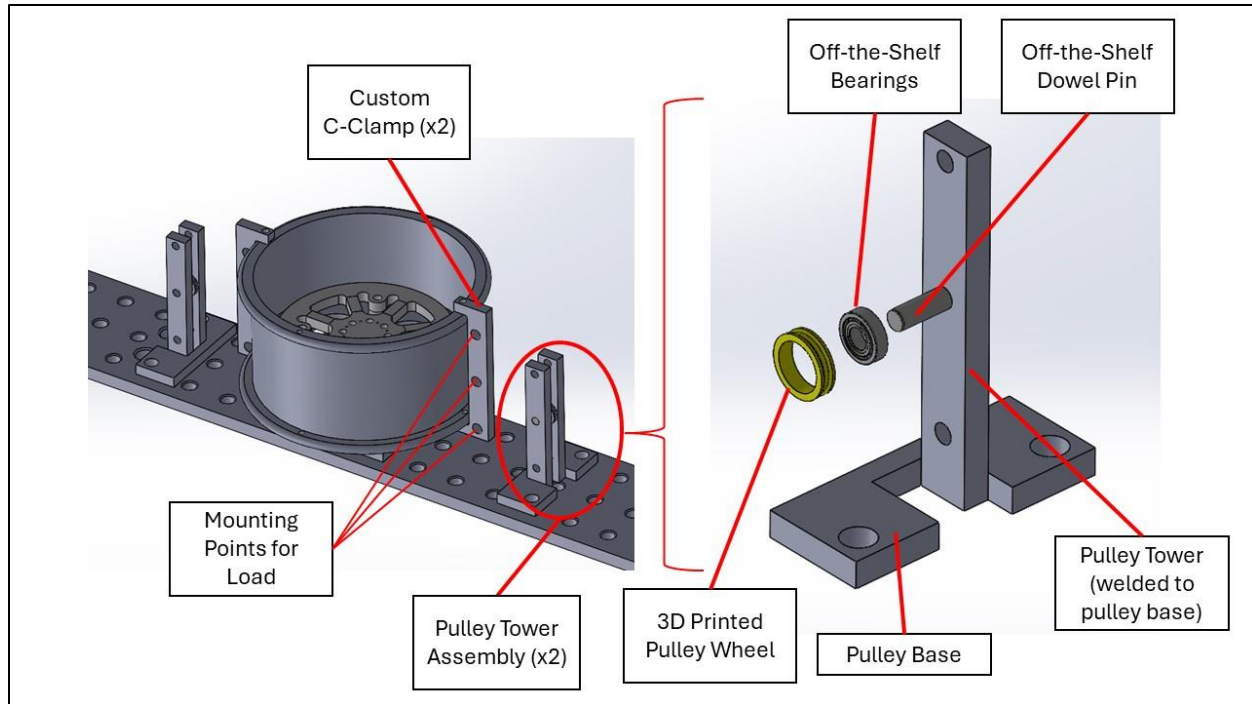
CAD assembly of finalized WFT calibration jig. Pulley position can be changed along the weld table with fixture pins as well as pulley height along pulley tower.
